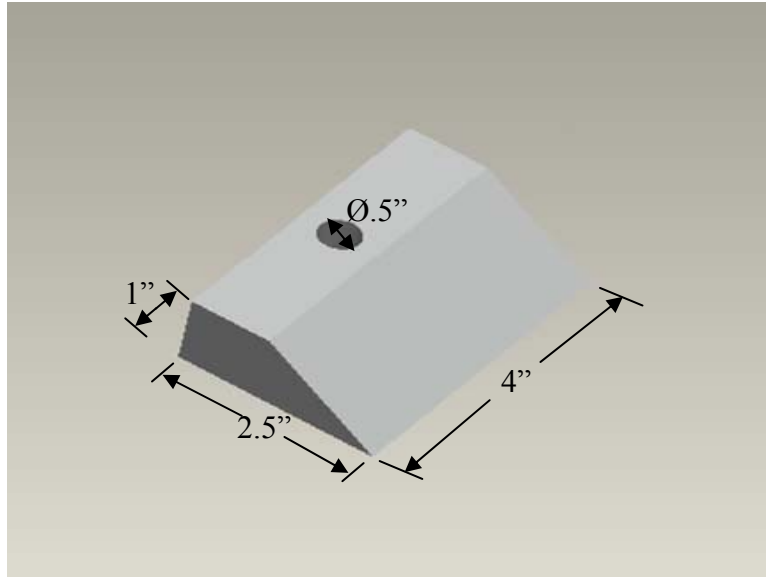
Scraper Dimensions used in the WVU Test Rig
